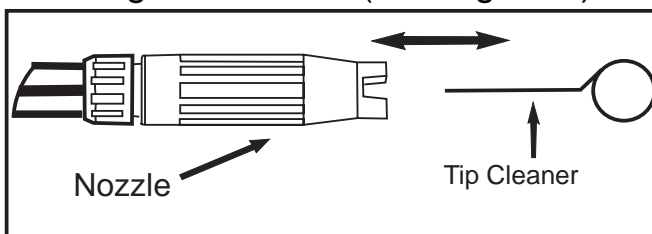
Insert tip cleaner in nozzle hole and move back and forth until debris is dislodged
